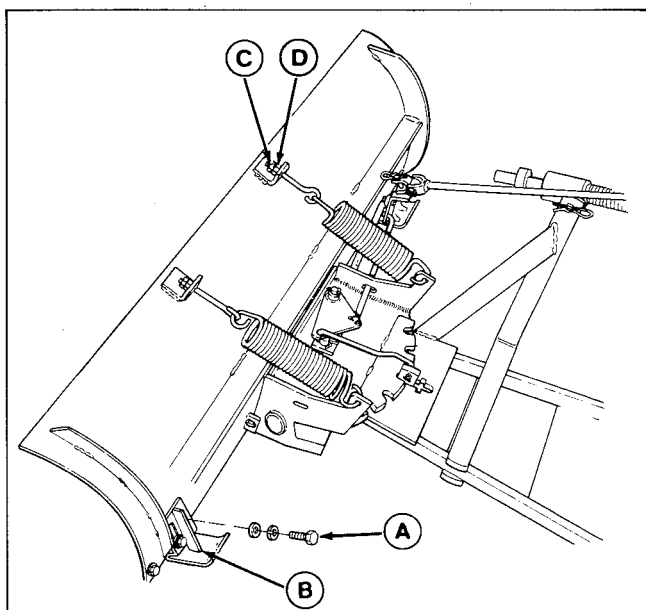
Skid Shoe Adjustment (46" Blade Shown)
